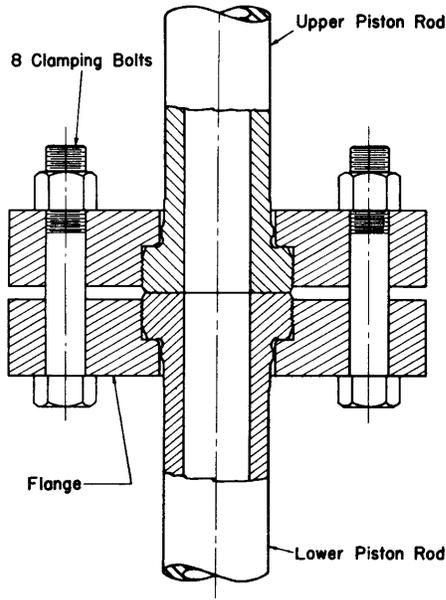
Section showing the Piston Ends of the Rods clamped together during a Test
